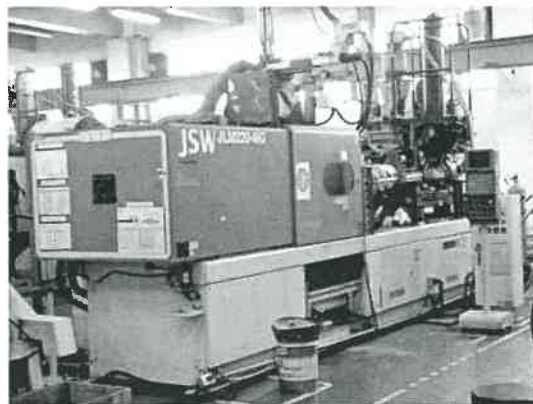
THIXOMOLDING MACHINE (JSW INC., JLM220-MG)
